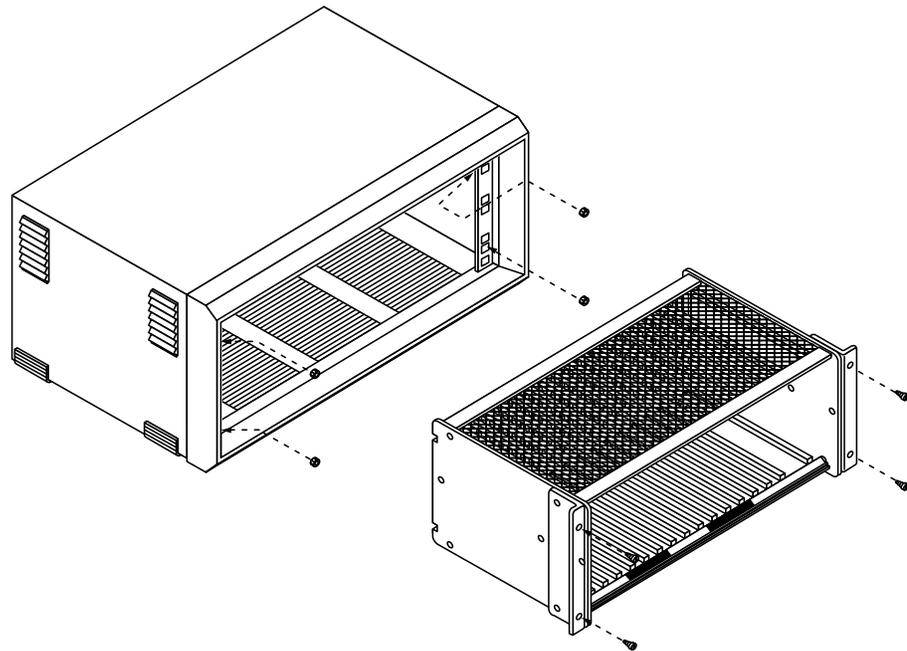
Tabletop Cabinet with 19-inch Chassis Removed
